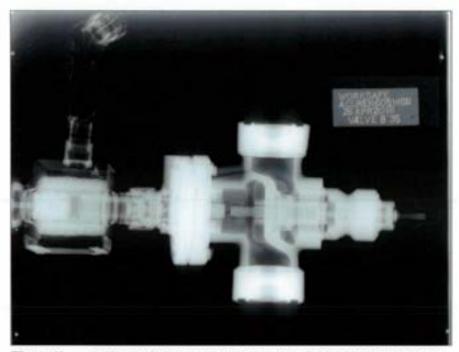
Radiographic image of solenoid valve B-35 with stem out and partially open.
